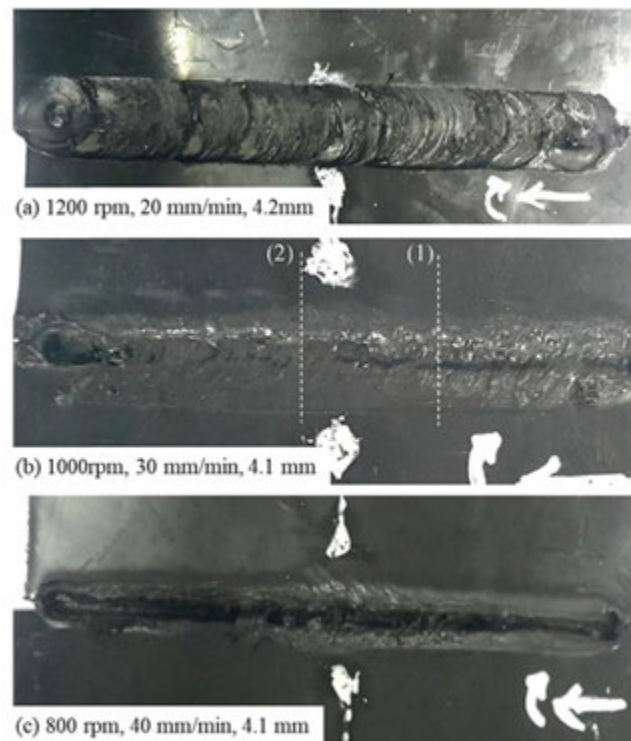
Weld line appearances at different weld conditions (a) uniform with striations, (b) uniform with surface melting, and (c) groove. Reproduced from Sheikh-Ahmad, J.Y., *et al.*, 2019. Friction stir welding of high density polyethylene – Carbon black composite. *Journal of Materials Processing Technology* 264 (4), 402–413.
